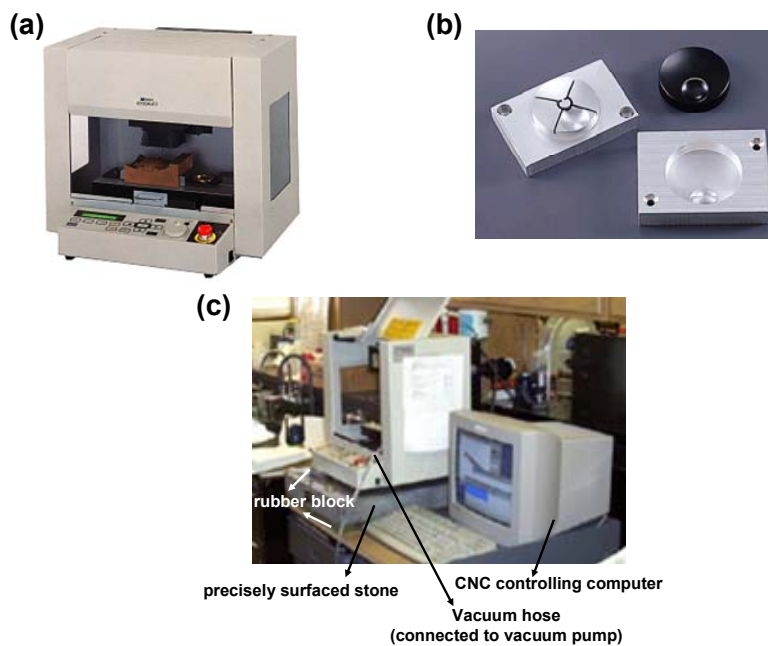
(a) CNC machine by Roland Co. (b) fine products from CNC machine (c) CNC machine set up for making parts.
